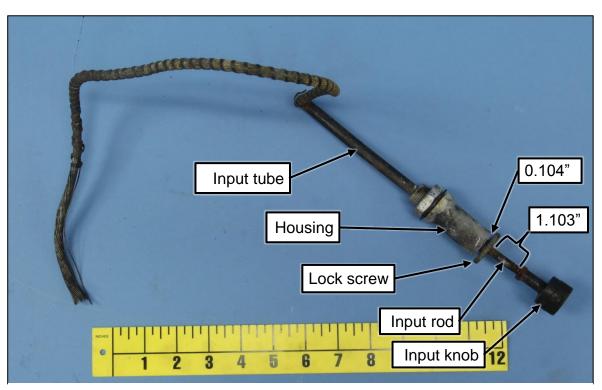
Overall views of the throttle control assembly. The cable was cut at the location indicated.
